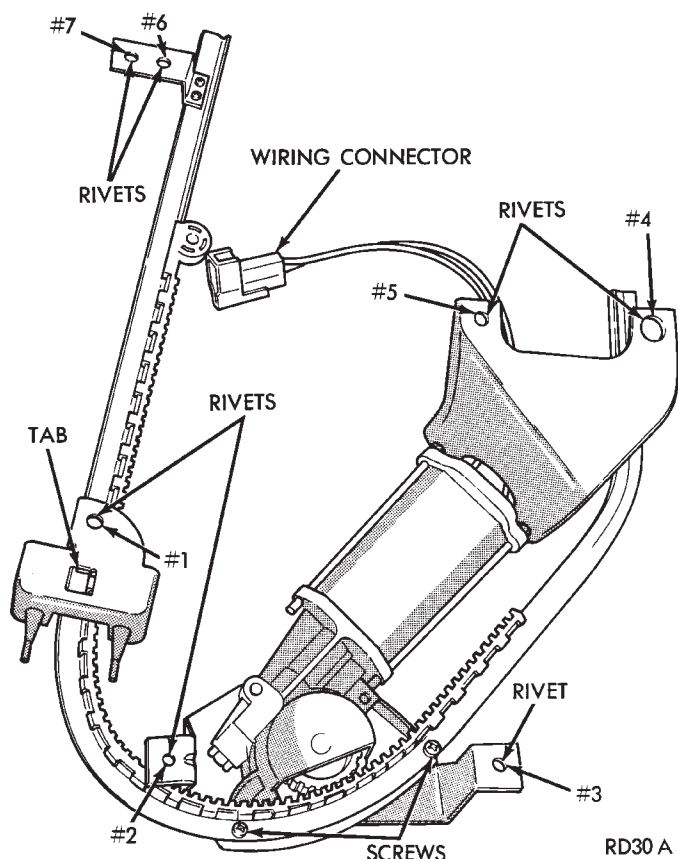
Flex Drive Window Regulator Rear Door — AP Body
